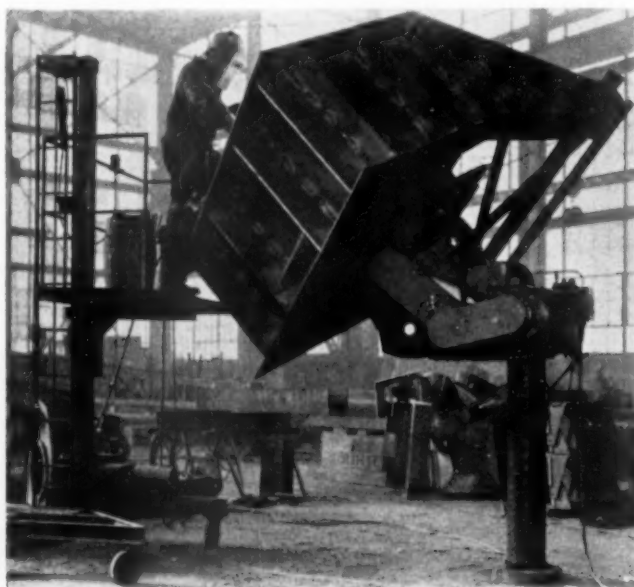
Cullen-Friestedt semi-special welding positioner that can reproduce itself.
